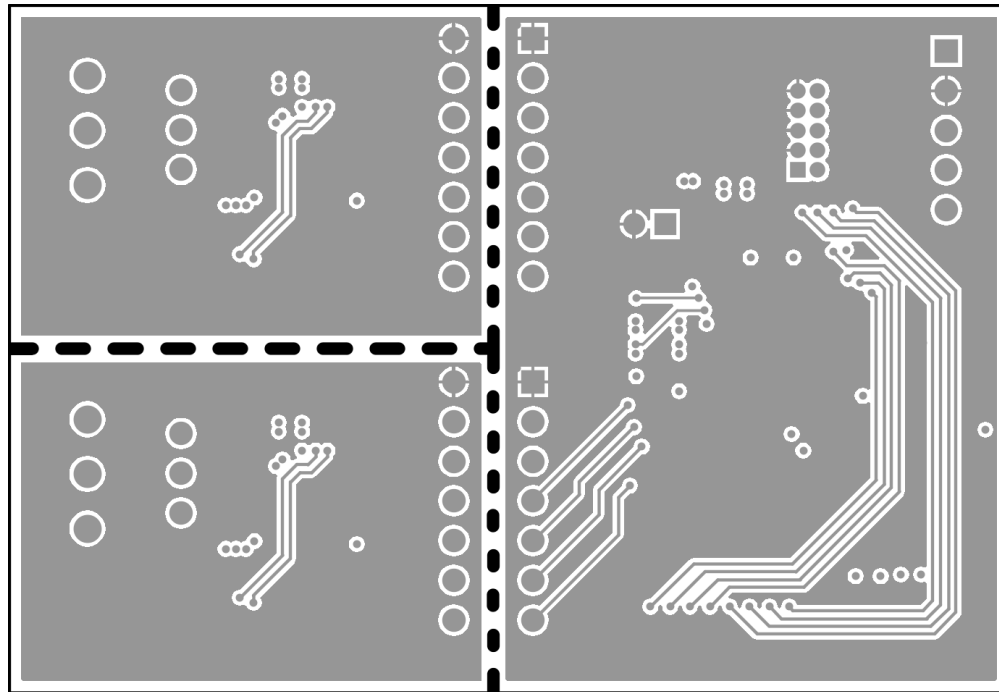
Layout view - Bottom Layer (mirrored, not to scale)
